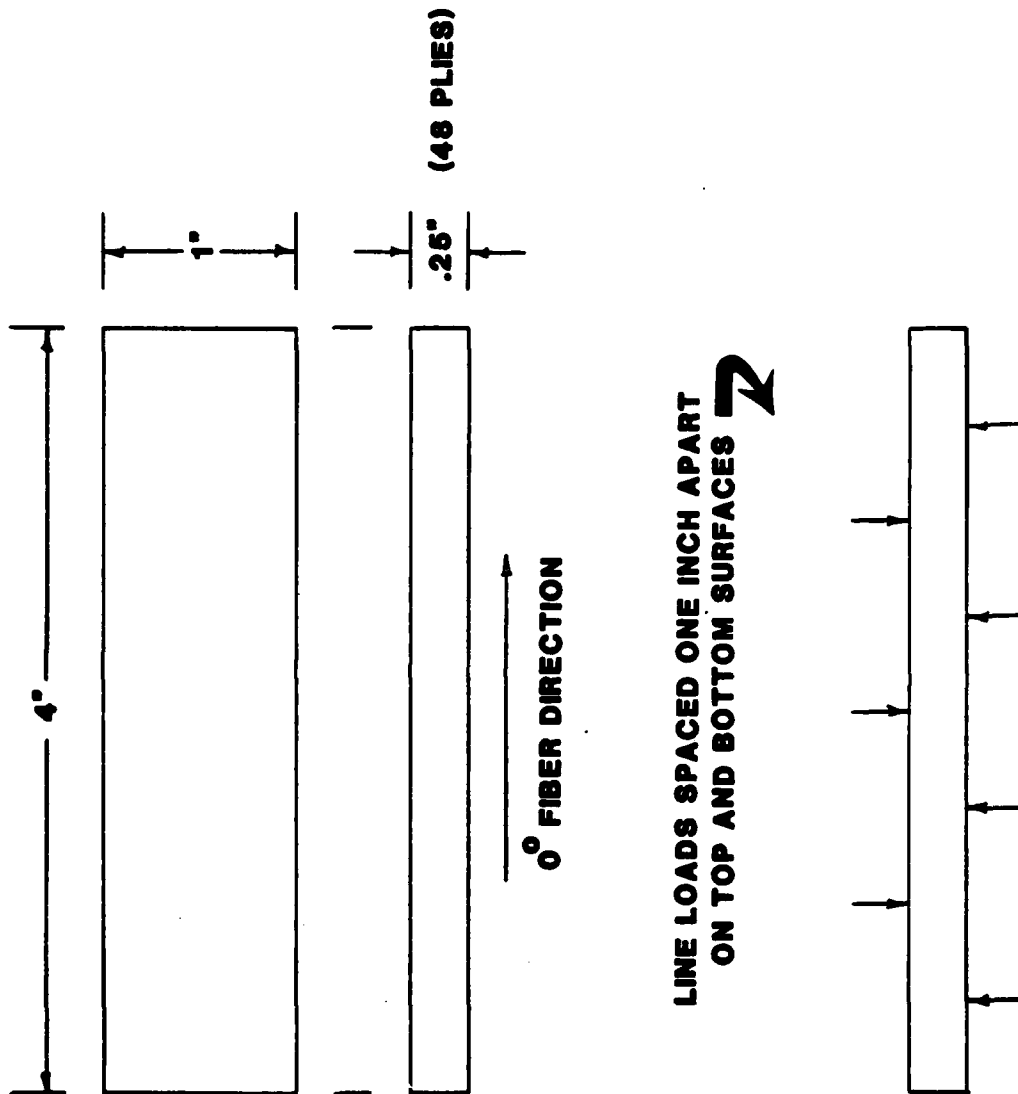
MULTI-SPAN BEAM SHEAR TEST SPECIMEN.
